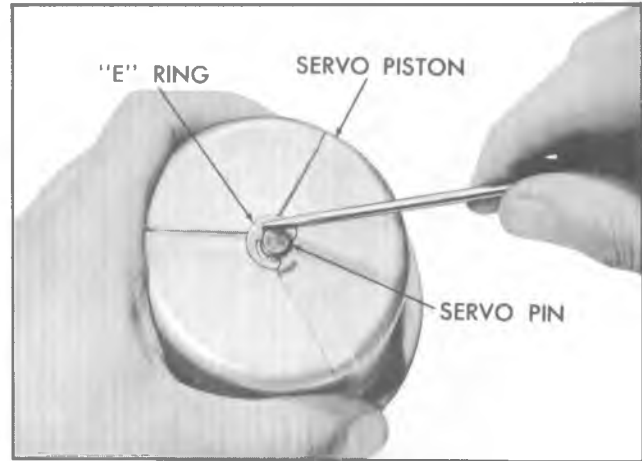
T—Removing Retaining "E" Ring from Rear Servo Pin
